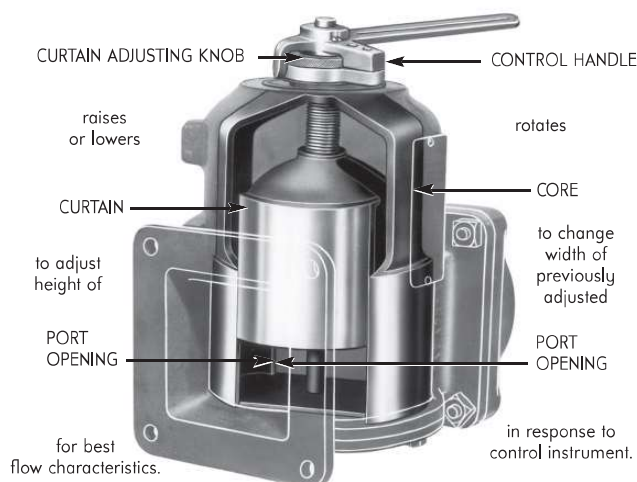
Figure A. Turning curtain adjusting knob changes port opening so valve can constitute optimum resistance in the system for good control.
